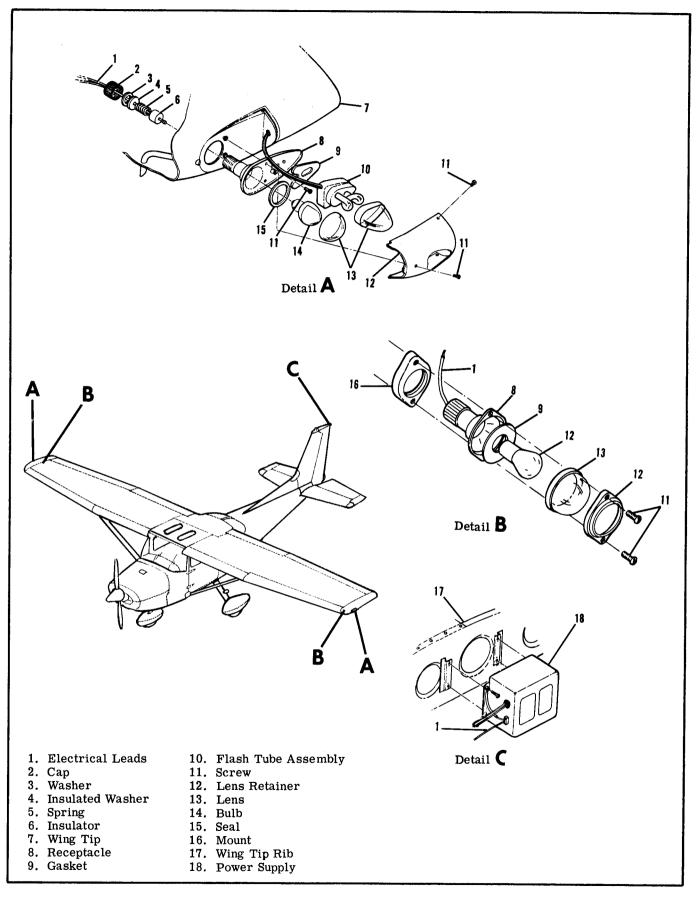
Navigation and Anti-Collision Strobe Light Installation
